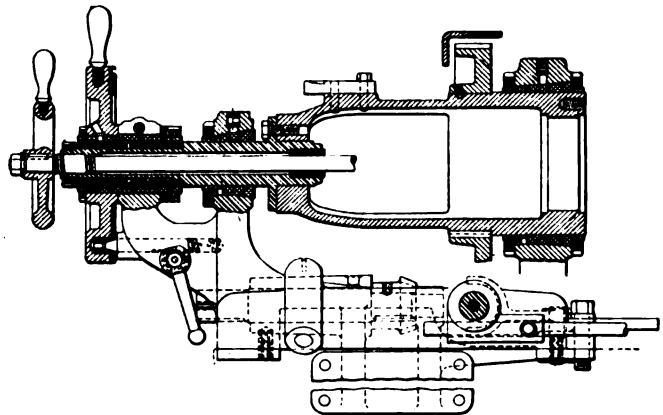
DETAILS OF WORK-HEAD MECHANISM
